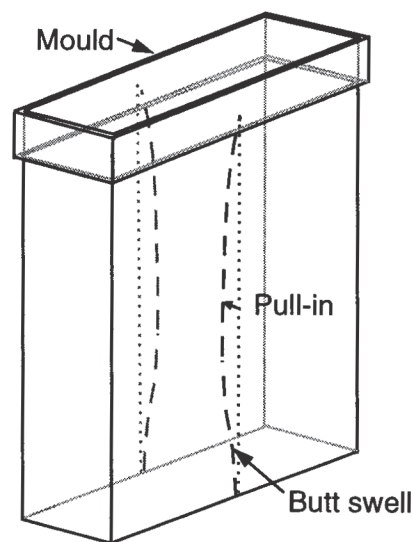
DC-casting of a sheet ingot in a rectangular mould. The pull-in and the butt swell are illustrated
